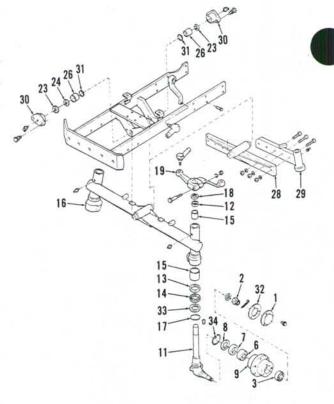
Exploded view of adjustable front axle used on 1700, 1710, 1900 and 1910 models with two wheel drive. Refer to Fig. 3 for legend except for the following:
